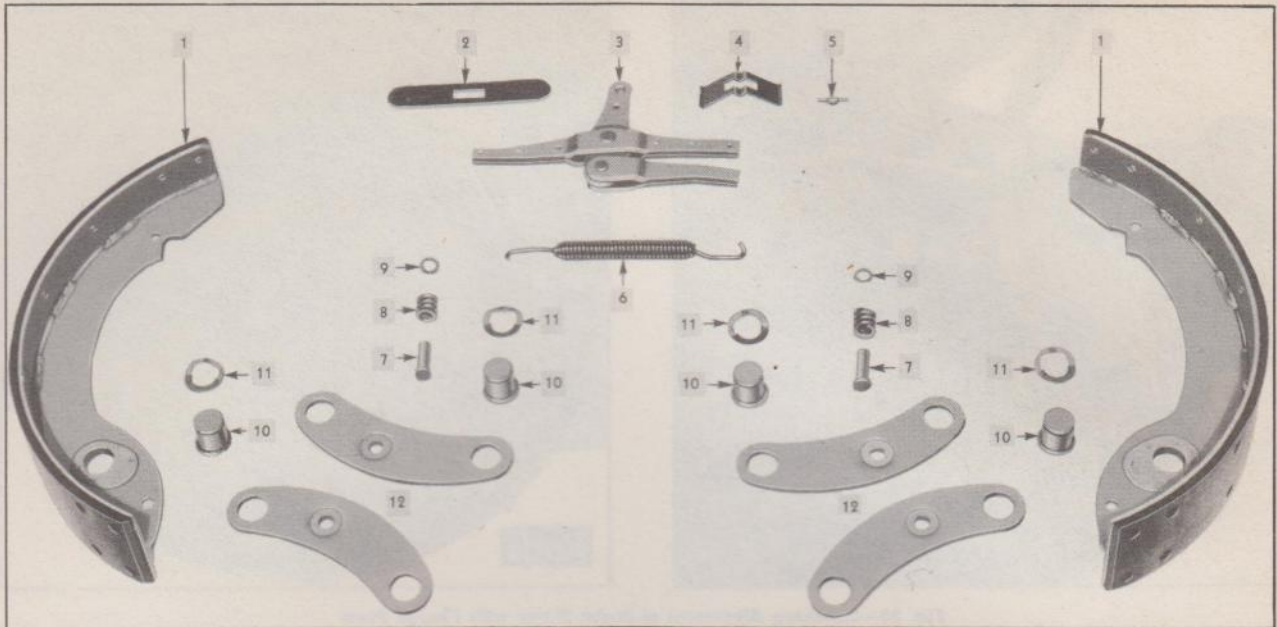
Layout of Rear Wheel Brake Parts—1½-Ton Trucks
